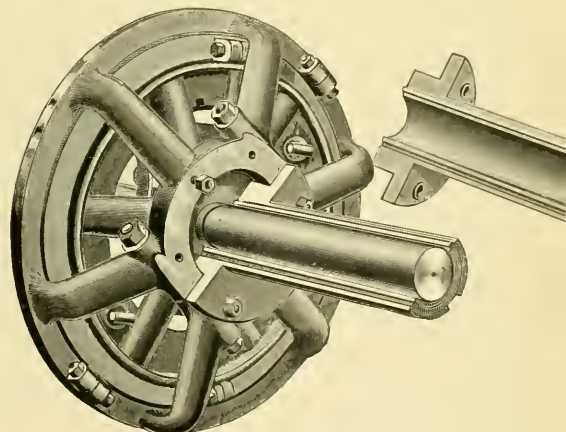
FIG. IV—VIEW WITH PART OF SLEEVE REMOVED.
